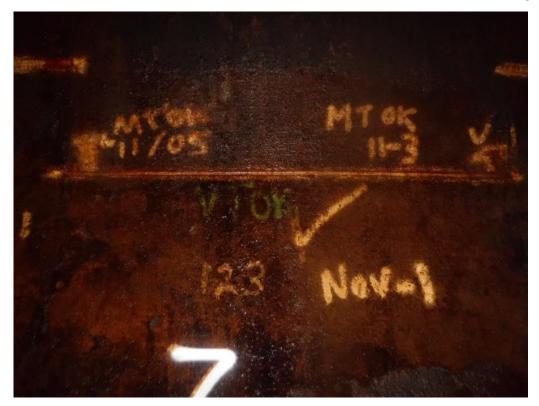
PREVIOUSLY REPAIRED AND TESTED WELD – CAN 7
